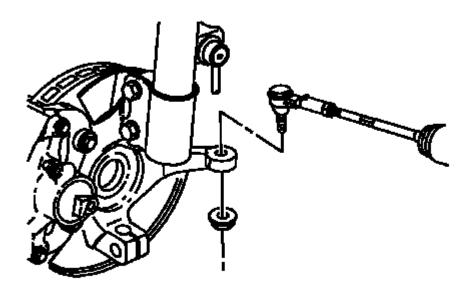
View Of Tie Rod End To Steering Knuckle Courtesy of GENERAL MOTORS COMPANY
